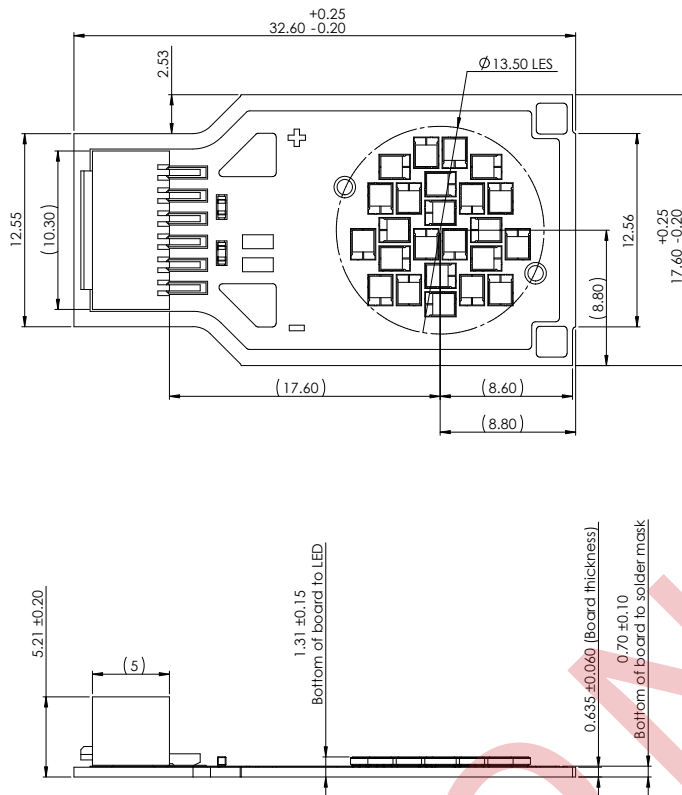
Package outline drawing for LUXEON S3000 / LXSx-Pxxx-0024.
